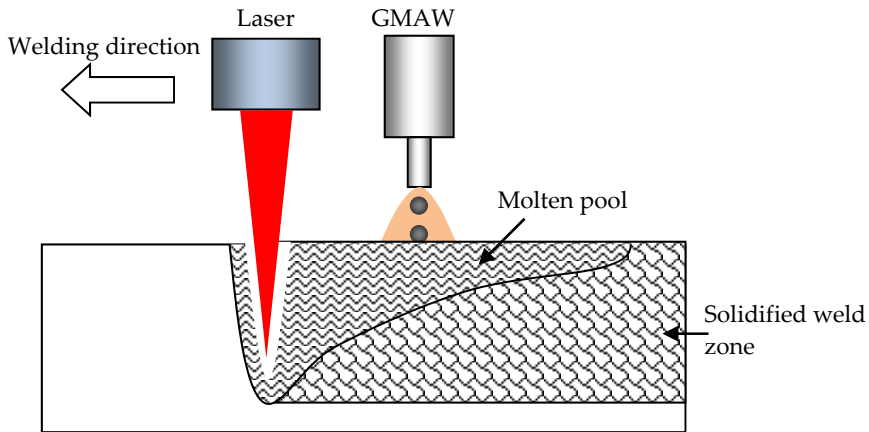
Schematic view of hybrid laser-GMA welding system
